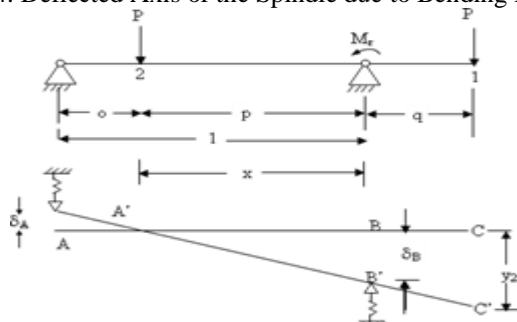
Deflected axis of the Spindle due to Compliance of the Spindle Support
